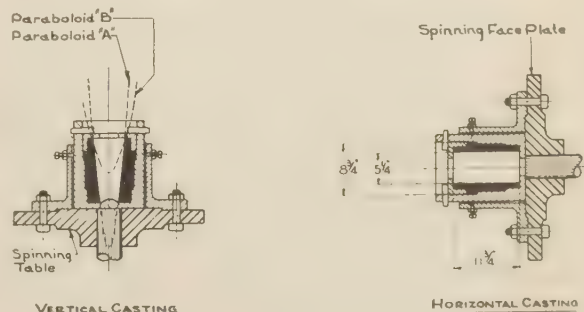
TRUE CENTRIFUGAL METHOD OF CASTING RADIAL-ENGINE CYLINDER BARRELS
